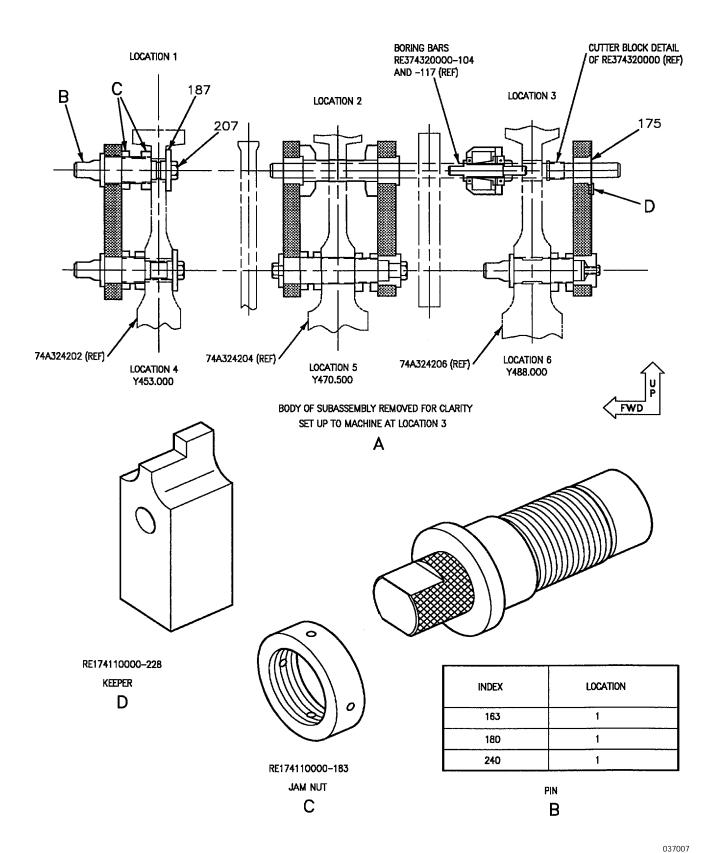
Setting Up to Machine I.D. of Bushing or Lug at Location 3, Y488.000
